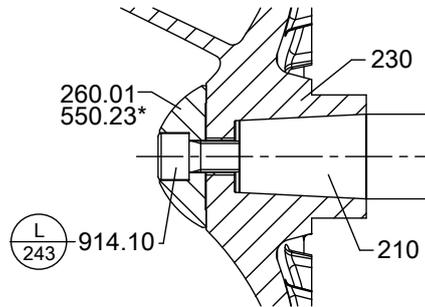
Impeller fastening elements, sizes 800-370, 800-400, 800-401
